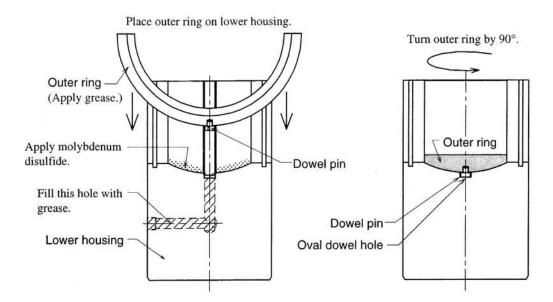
Installation of Bearing Outer Ring to Lower Housing
